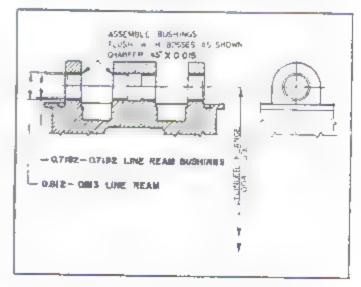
Dimensions of Rocker Shaft Support Bushings
